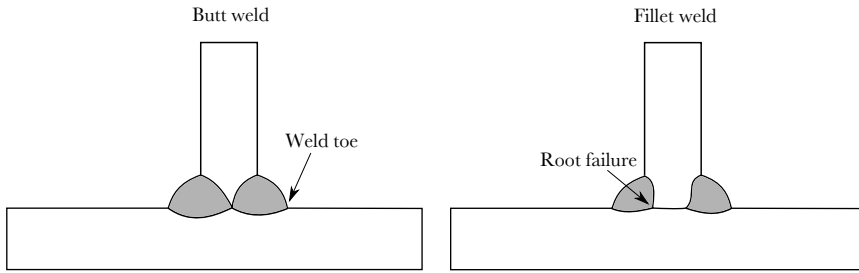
Illustration of a fillet weld and a butt weld in a T-joint configuration.
